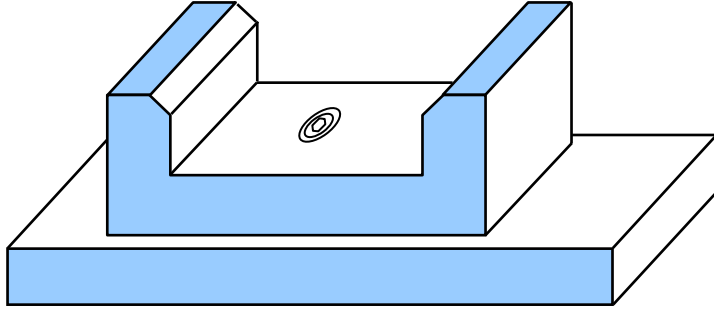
The fixture used for measuring microtools with the electrolyte basin.
